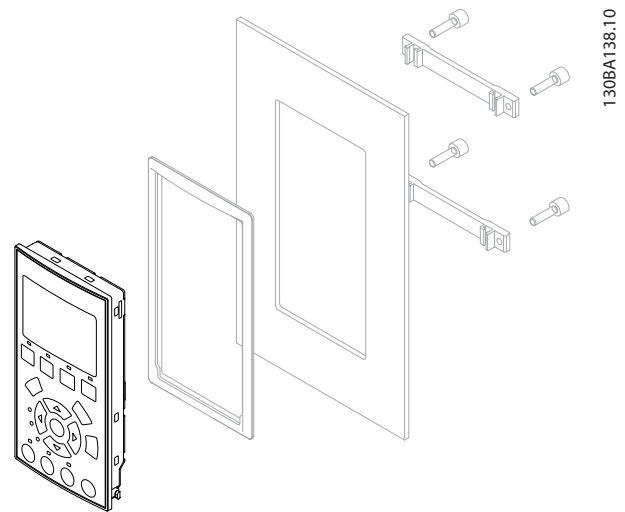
LCP Kit with Graphical LCP, Fasteners, 3 m Cable and Gasket
